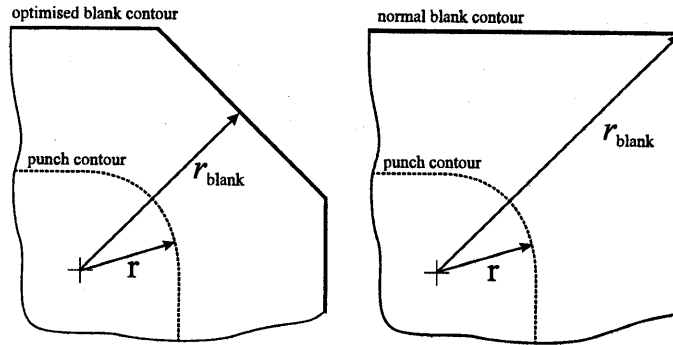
Quart of the deep drawing blanks showing the product radius and the edge cut of the optimised blank
